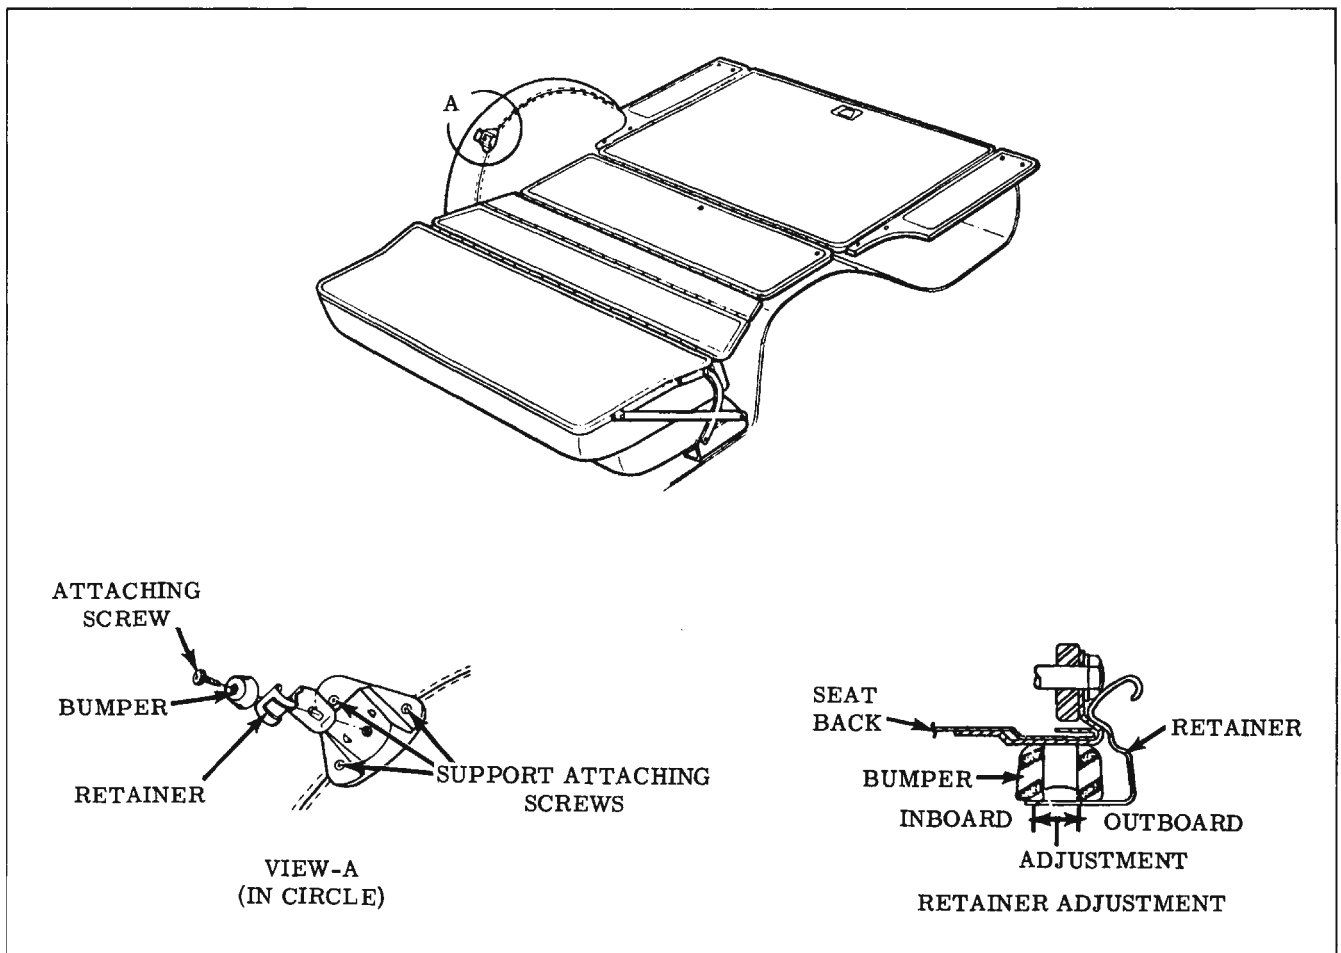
Folding Rear Seat Back Bumper, Retainer and Support
